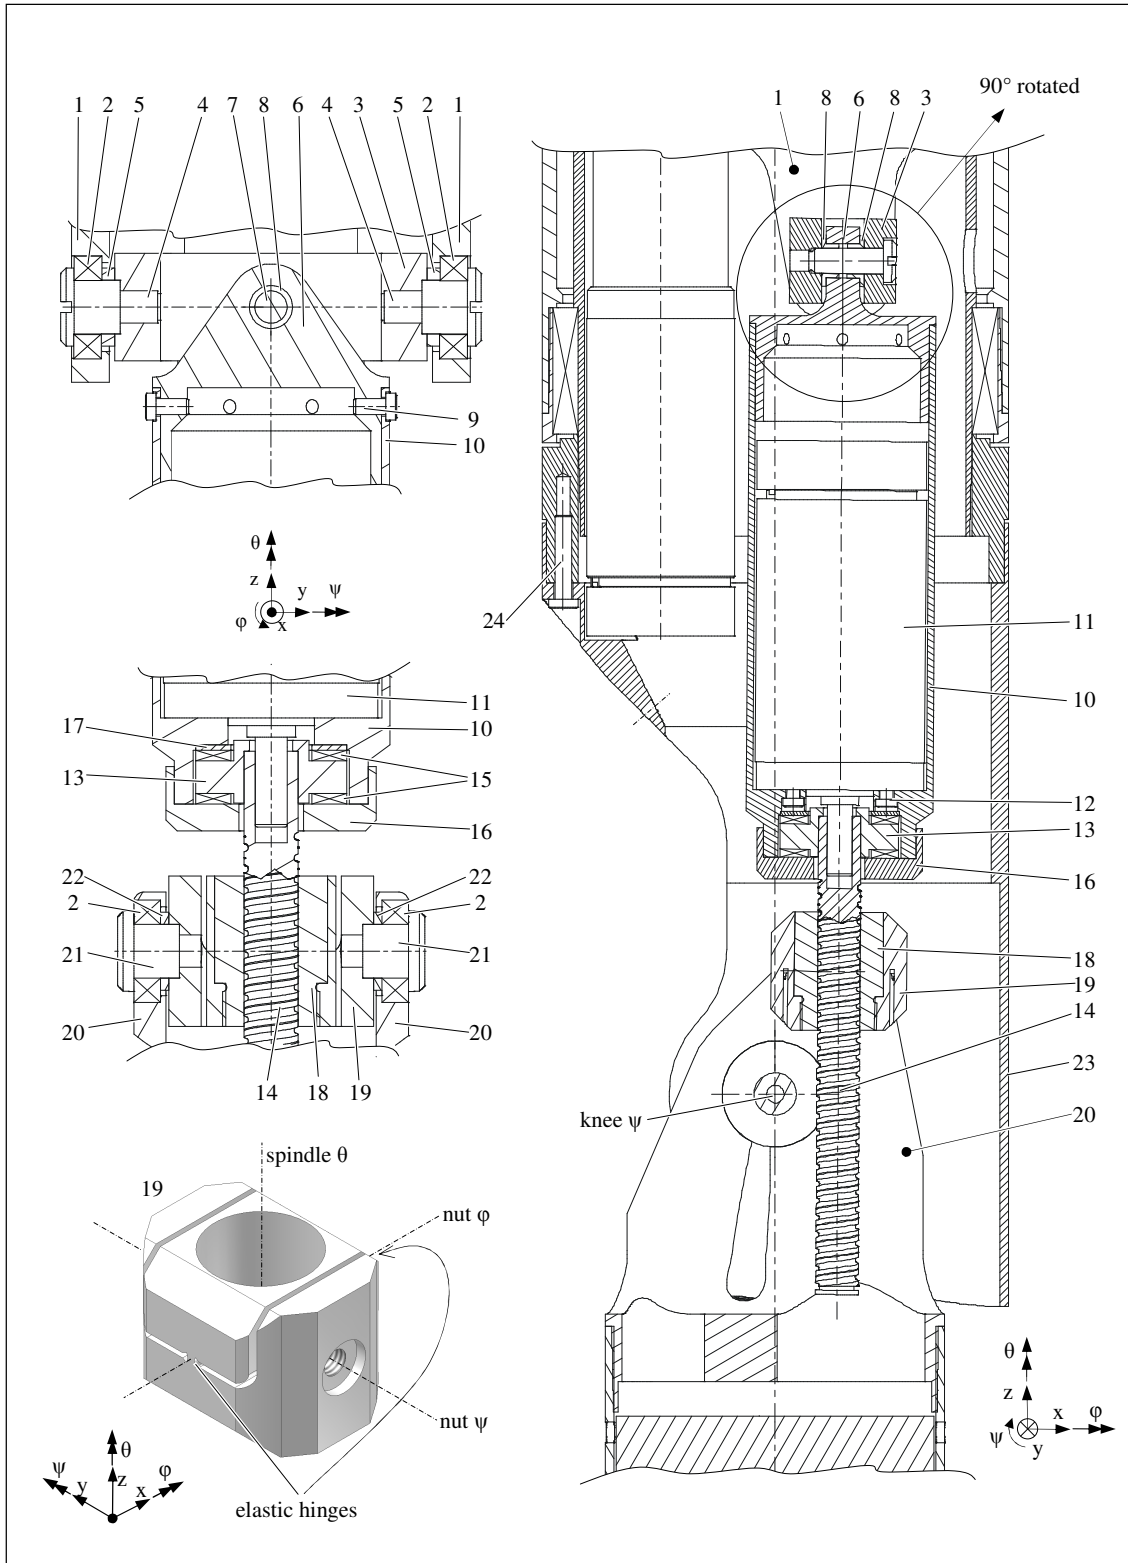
Section view (xz-plane) of the upper leg (right) and two section view details of the ball screw actuation (above left and middle left); motor bracket (1), single row deep groove ball bearings (2), intermediate body (3), fitting bolts (4), distance rings (5), cup end (6), fitting bolts(7), plain bearings (8), M3 bolts (9), motor cup (10), Brushed DC motor (11), M3 bolts (12), flange (13), ball screw spindle (14), axial needle roller bearings (15), cover (16), axial bearing washer (17), ball screw nut (18), universal joint (19), lower leg knee connector (20), fitting bolts (21), distance rings (22), upper leg knee connector (23), M4 bolts (24). The universal joint (19) is shown below left.
